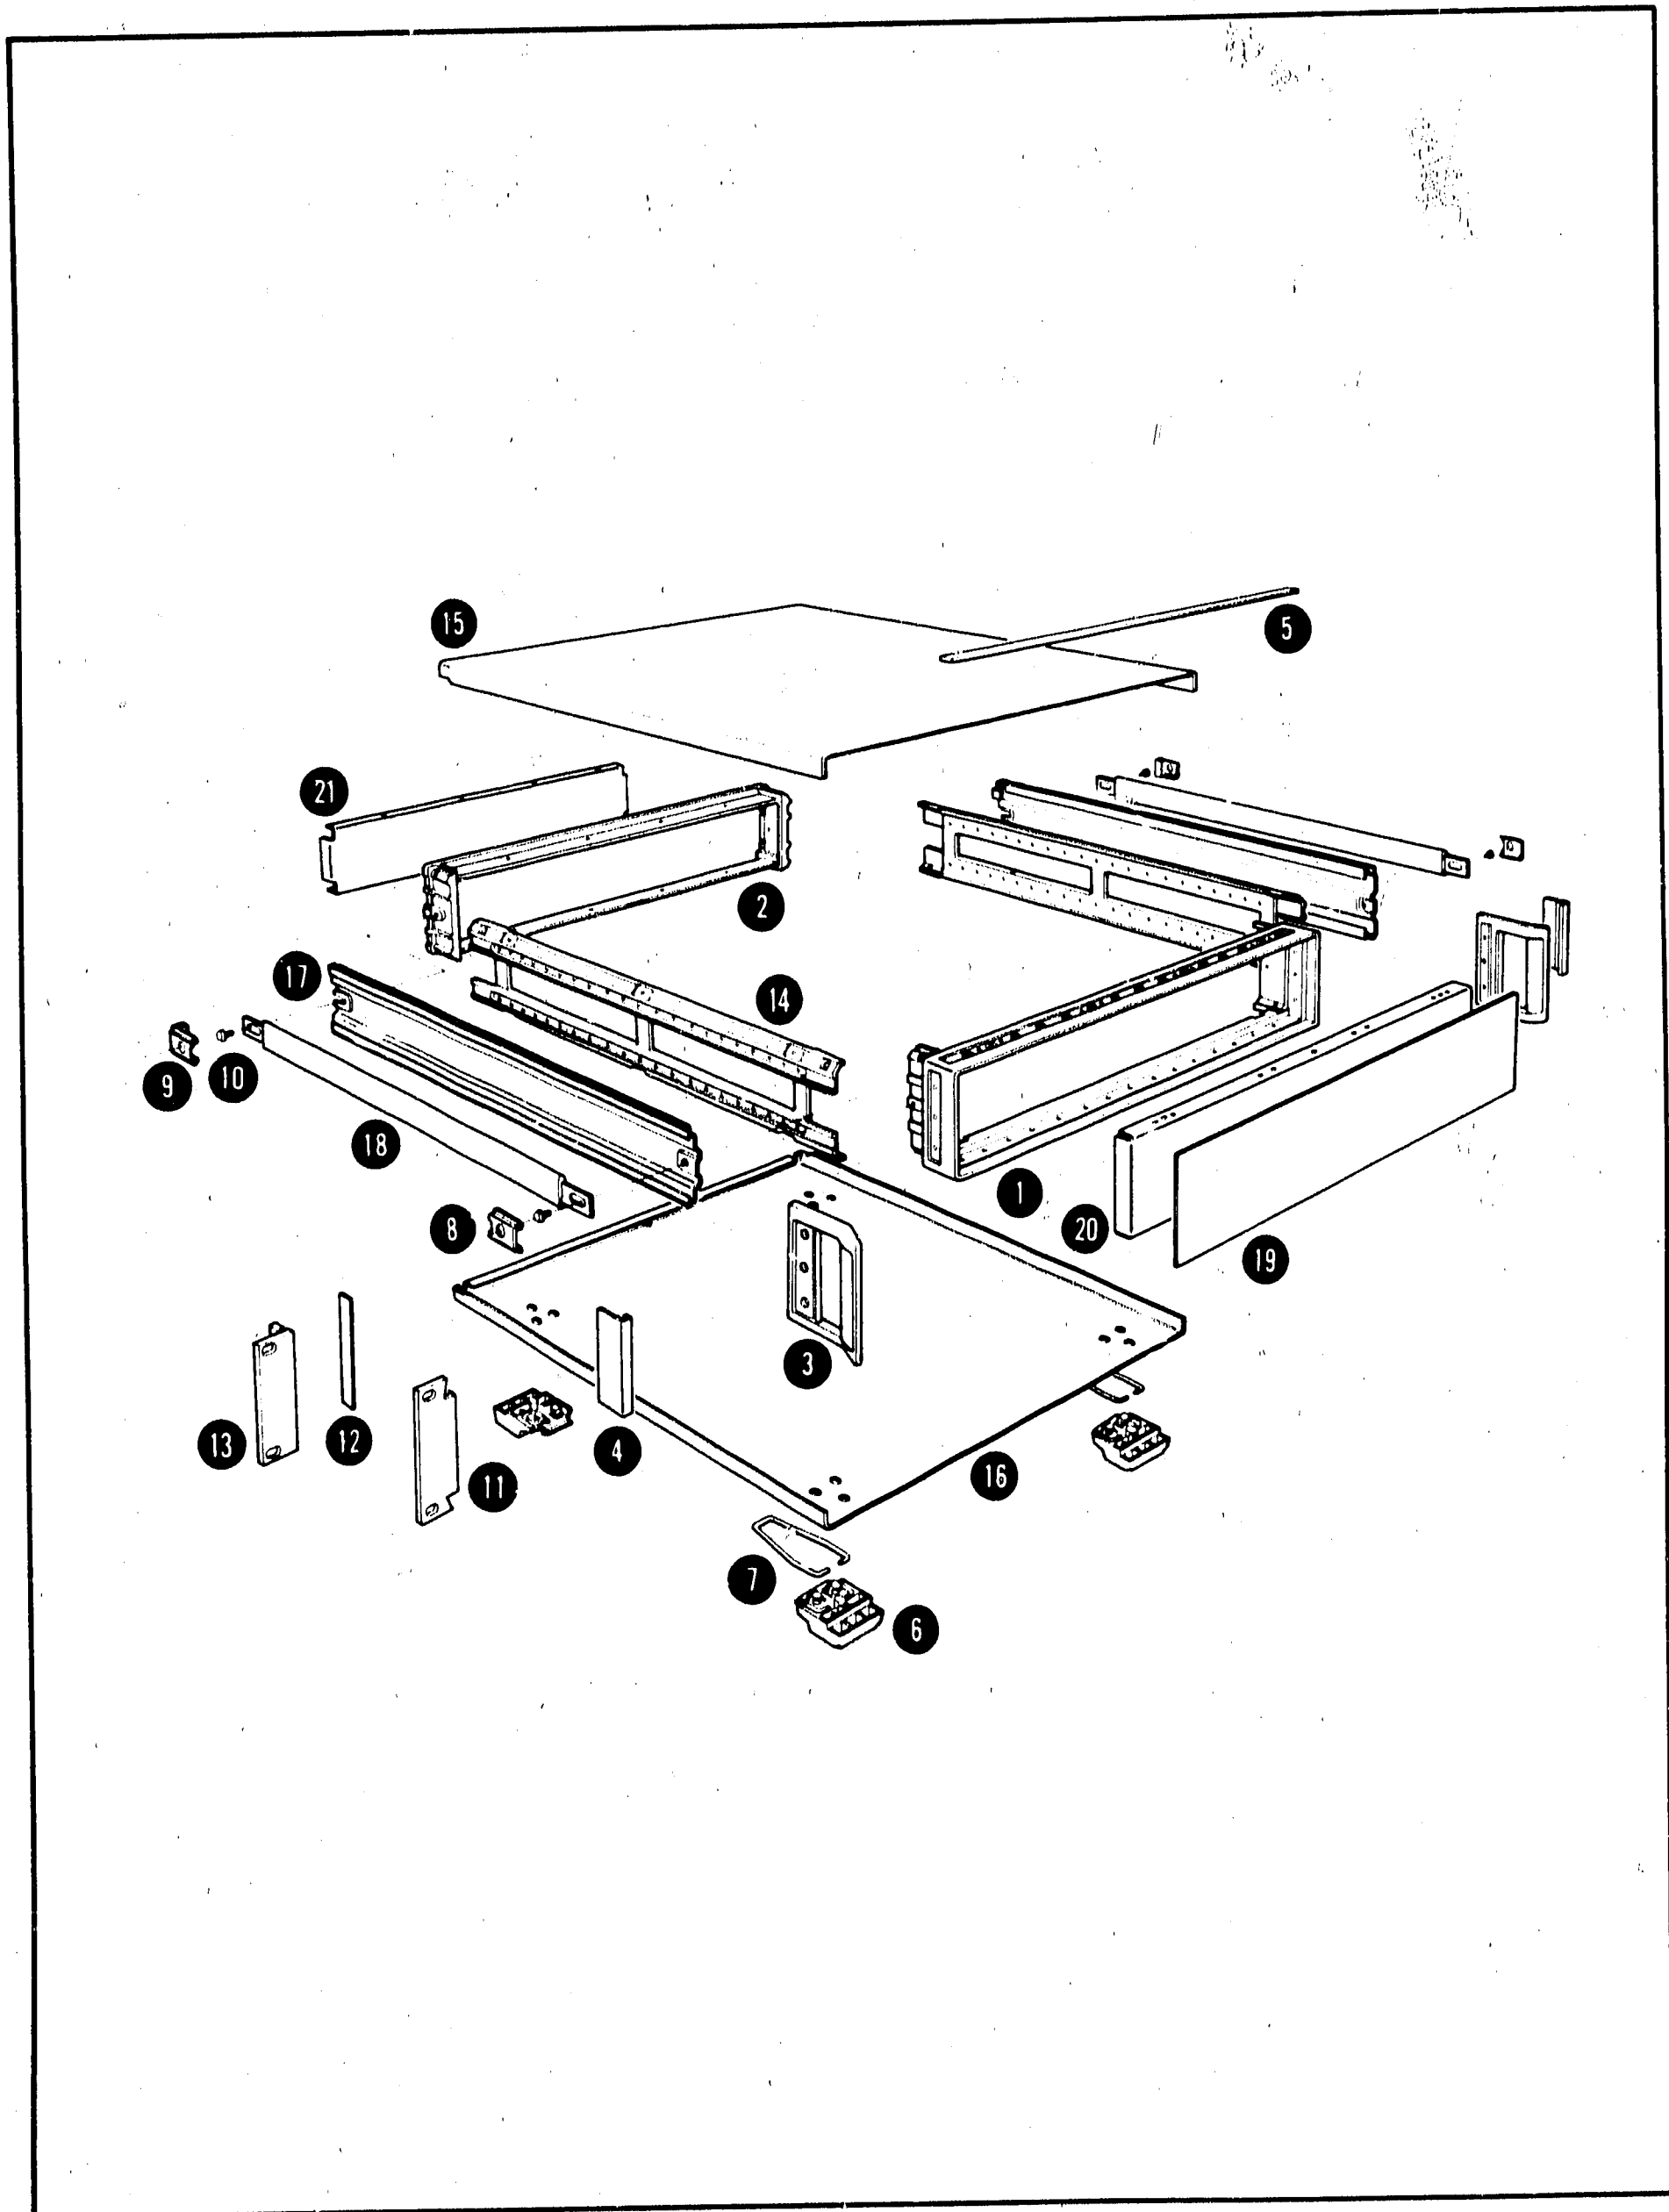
Cabinet Parts, Exploded View (1 of 2)
